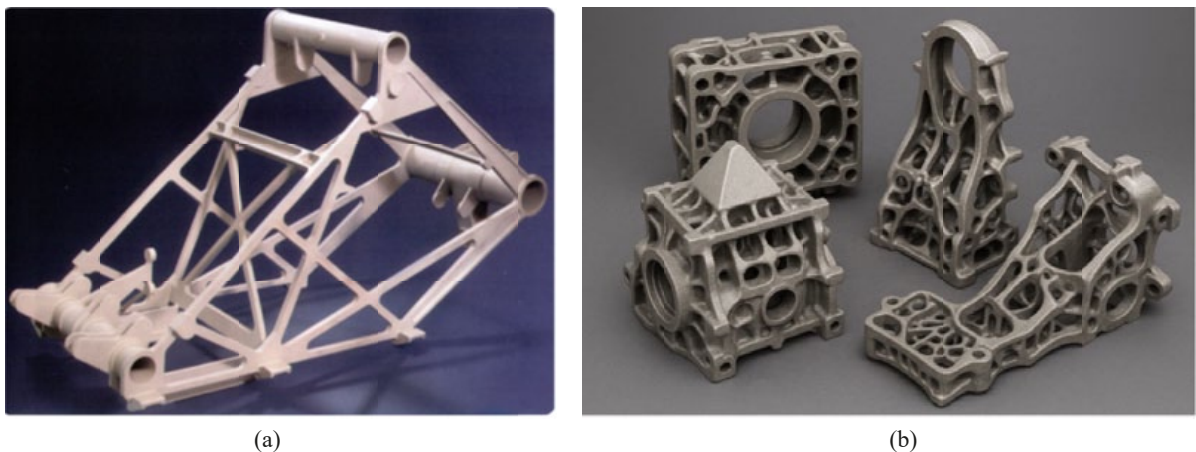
A modern investment casting of a spacecraft control assembly made from an aluminum alloy at Howmet’s Bethlehem Casting, Pennsylvania, USA (dimensions $91 \times 61 \times 35$ cm) (a). Until recently, such components were manufactured by assembling several dozen separate parts. On the right, an image generated by artificial intelligence, inspired by real-world technologies, requirements, and design principles (b).
